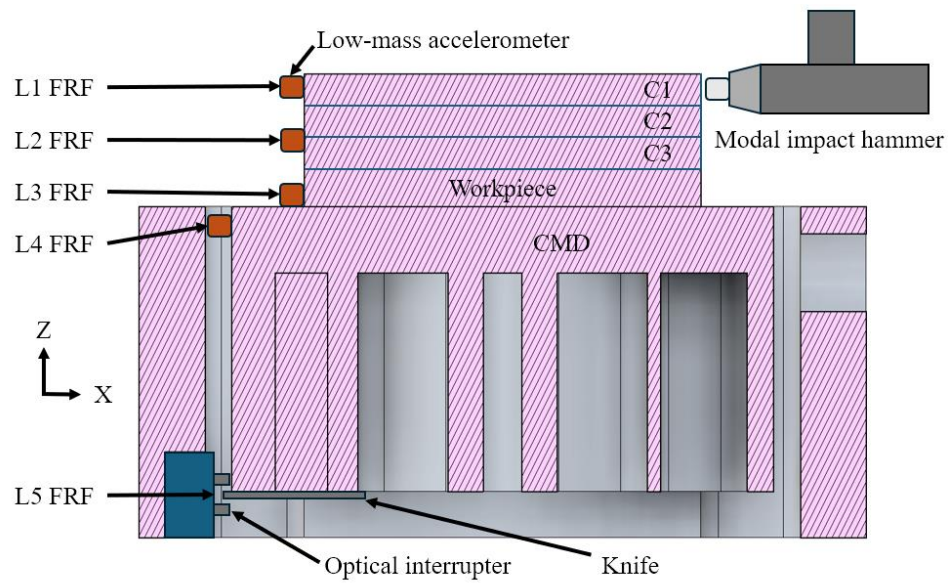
Section view for accelerometer and hammer strike locations used in the tap testing [18].
